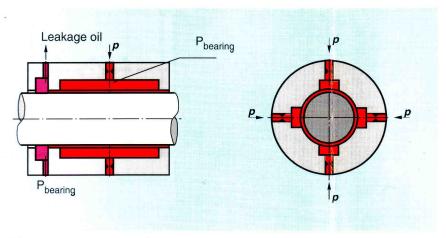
Schematic diagram of full hydrostatic bearings (cavity bearings) supporting the piston rod
